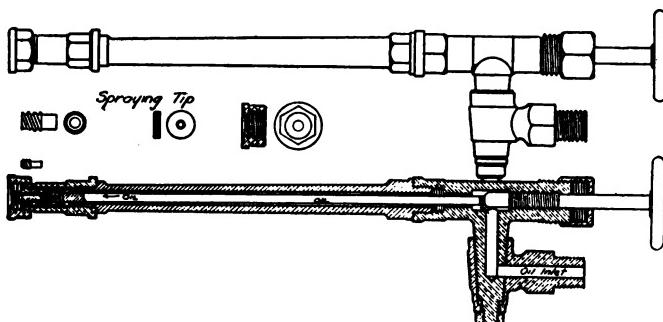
Mechanical Burner Used in Baku Oil Fields.
